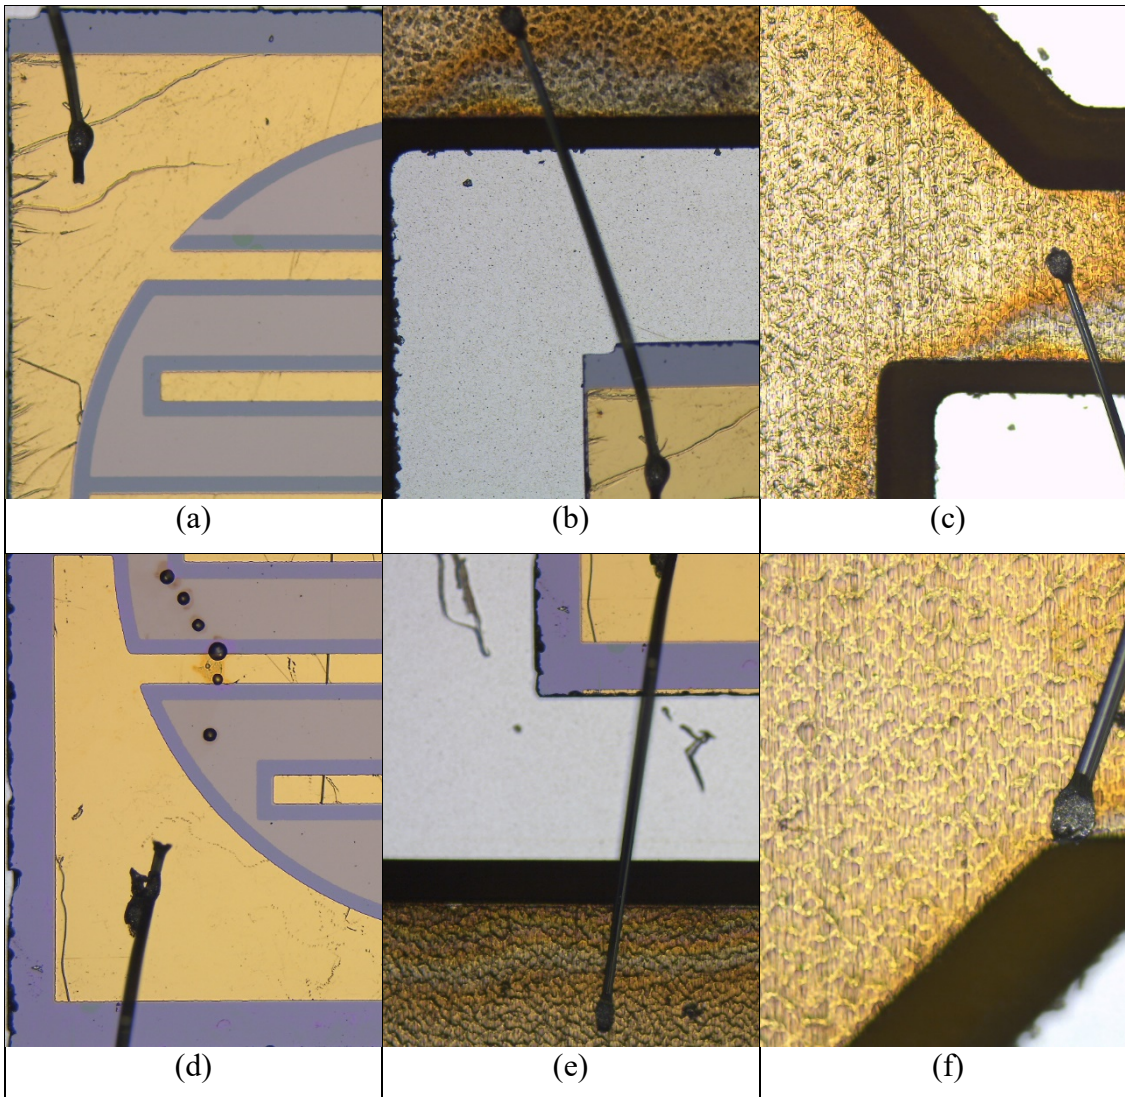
(a) Shows top resistor pad wire bonded using wedge bonding. (b) Shows top resistor pad and PCB wire bonding connection. (c) Show wire bonding to top leg of PCB. (d) Shows bottom resistor pad wire bonded using wedge bonding. (e) Shows bottom resistor pad and PCB wire bonding connection. (f) Show wire bonding to bottom leg of PCB.
